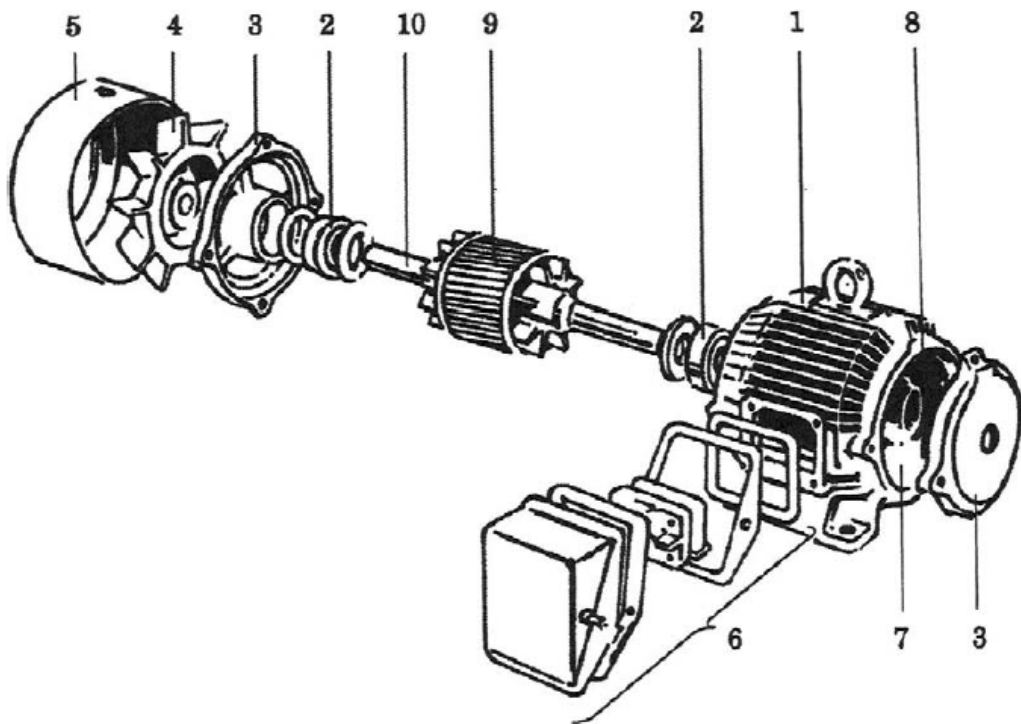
Exploded view of an induction motor: (1) motor case (frame), (2) ball bearings, (3) bearing holders, (4) cooling fan, (5) fan housing, (6) connection box, (7) stator core, (8) stator winding (not visible), (9) rotor, (10) rotor shaft.
